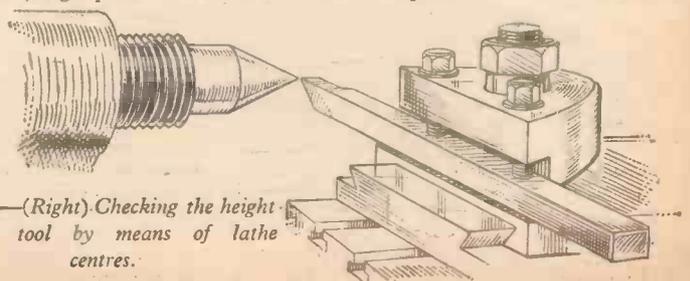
(Right) Checking the height of the tool by means of lathe centres.
